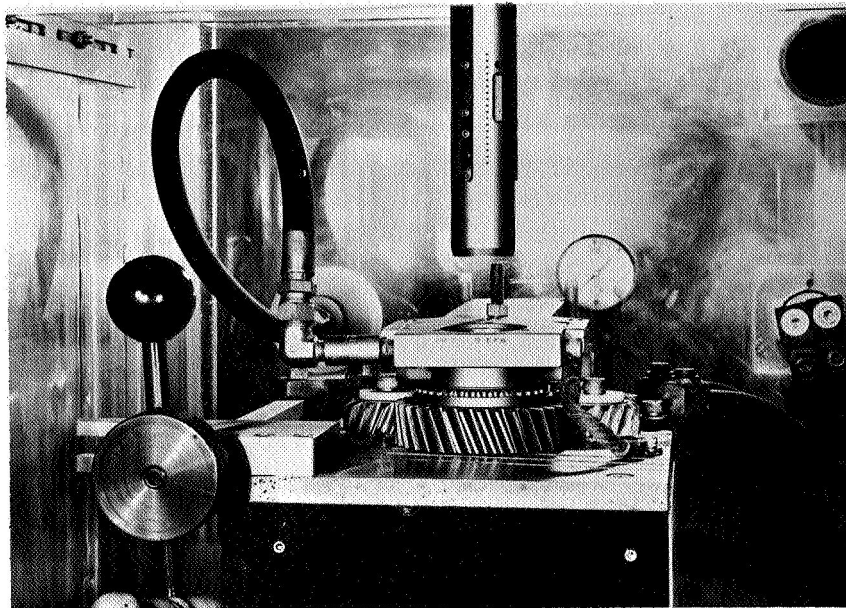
CLOSE-UP VIEW OF ECH TOOL AND WORKPIECE ARRANGEMENT (REF. 99)
